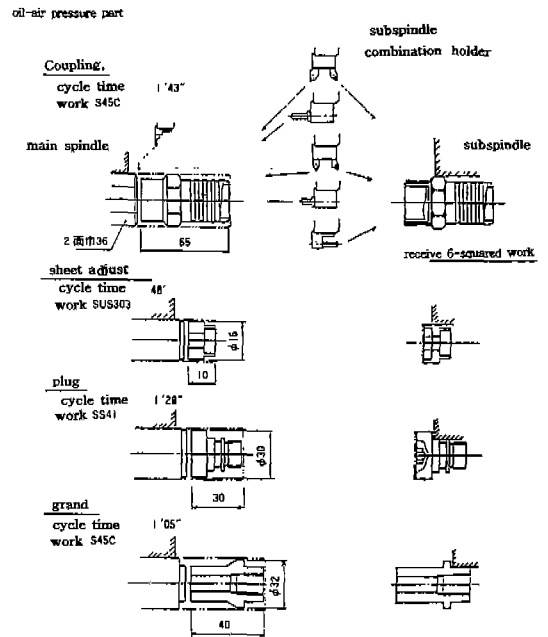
Examples of machining parts by using subspindle CNC-lathe
